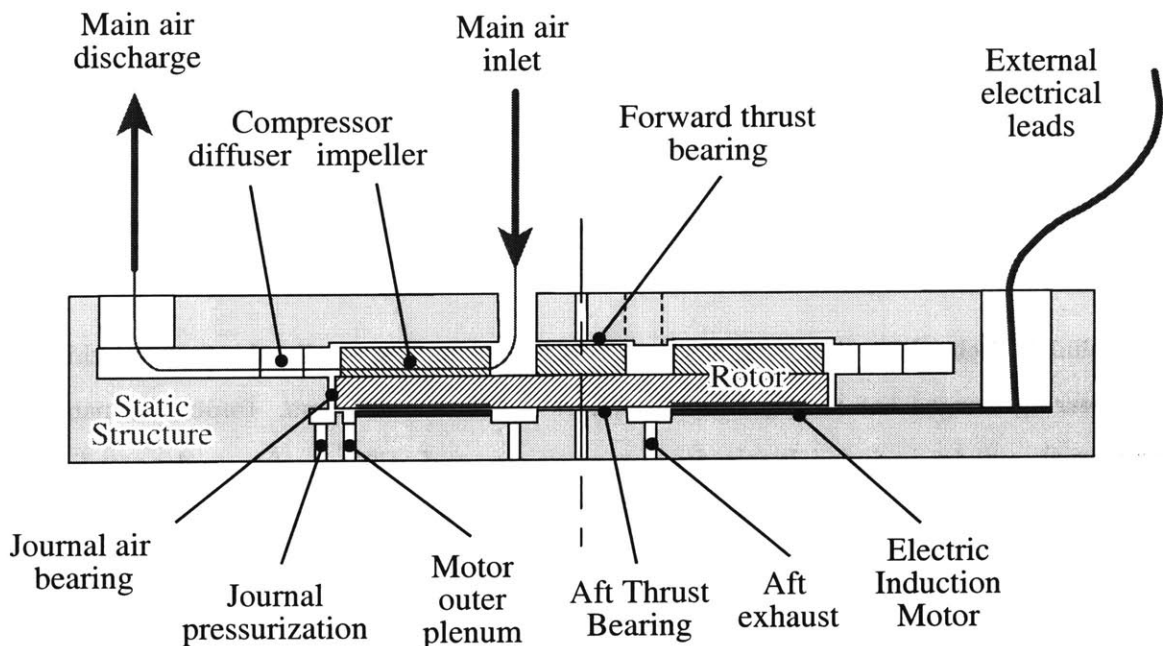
Cross-section schematic of the motor-driven compressor.
